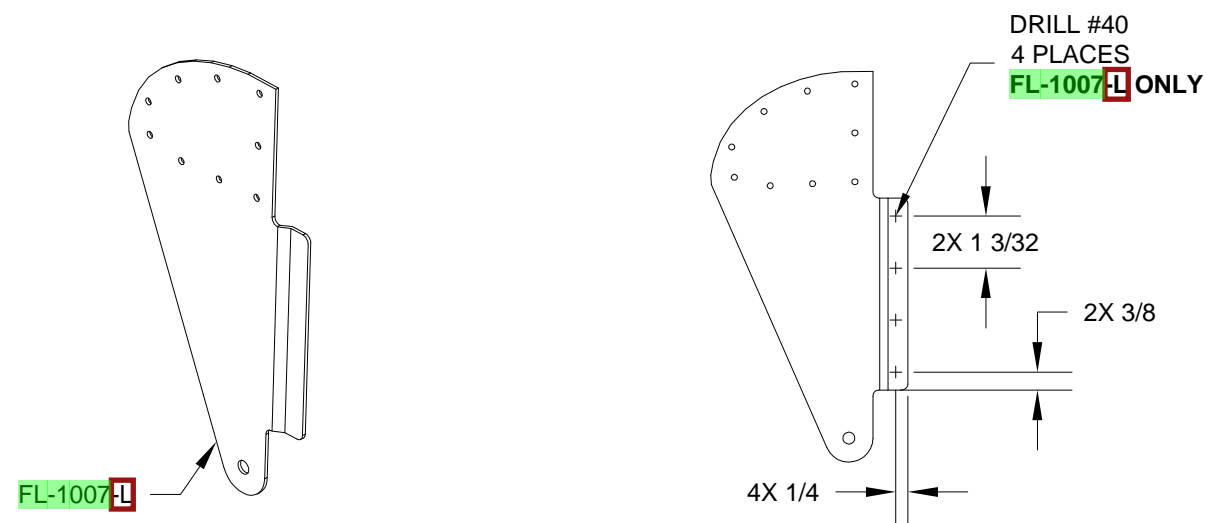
DRILL LEFT HINGE BRACKETS ONLY
